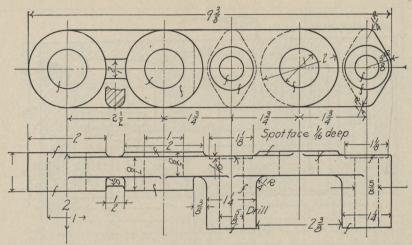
An incorrect drawing to be checked for errors (gear shifter bracket).
